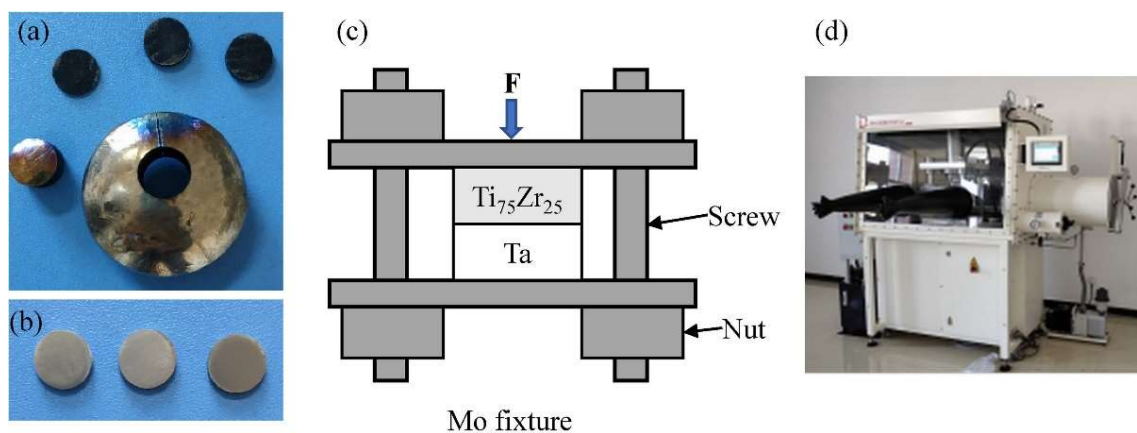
Specimens and assembly pictures: (a) ingots; (b) diffusion specimens; (c) assembly diagram; and (d) a vacuum glove box with a press.
